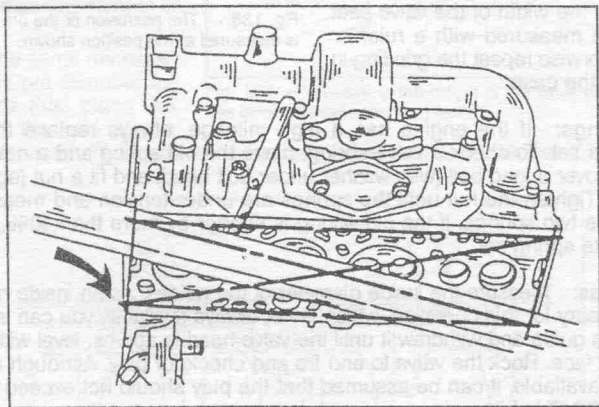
Checking the cylinder head gasket face for distortion.
